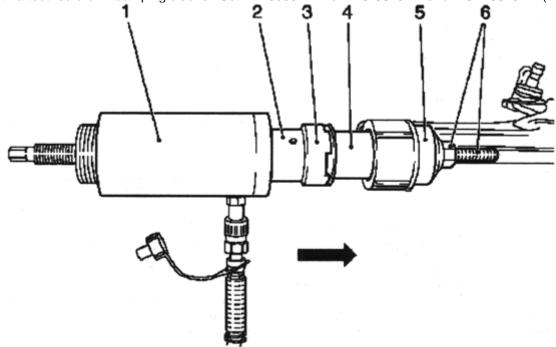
Mounting back damping Bushings: 1,2,3,5,6 - a special tool, 4 - damping bush
